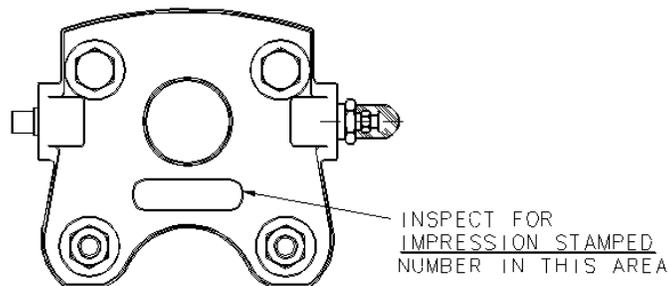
INSPECTION OF BRAKE CYLINDER HOUSING
